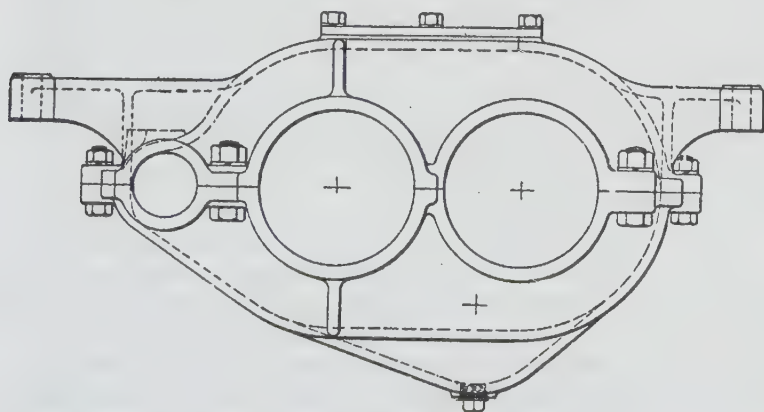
GEAR CASE DIVIDED THROUGH AXES OF SHAFTS.
